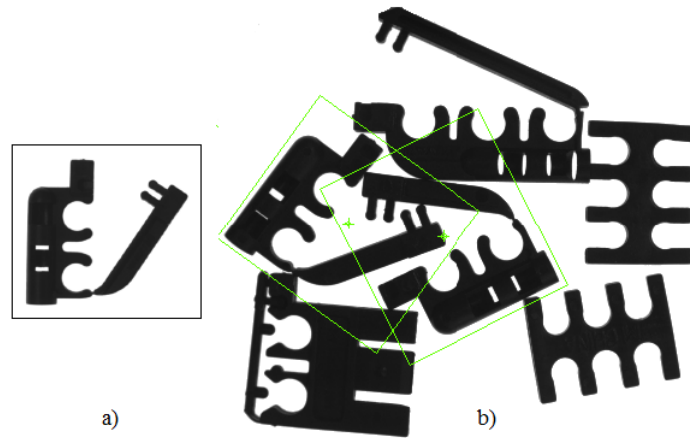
Geometric Matching a) Template b) Inspection Image
